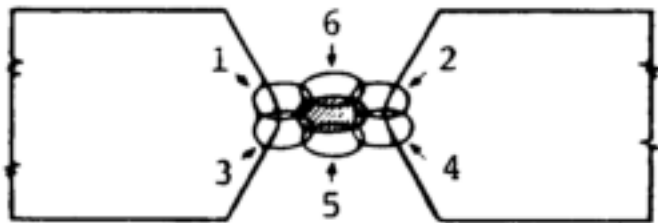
Backing methods for depositing weld beads at the root of a double V joint.
